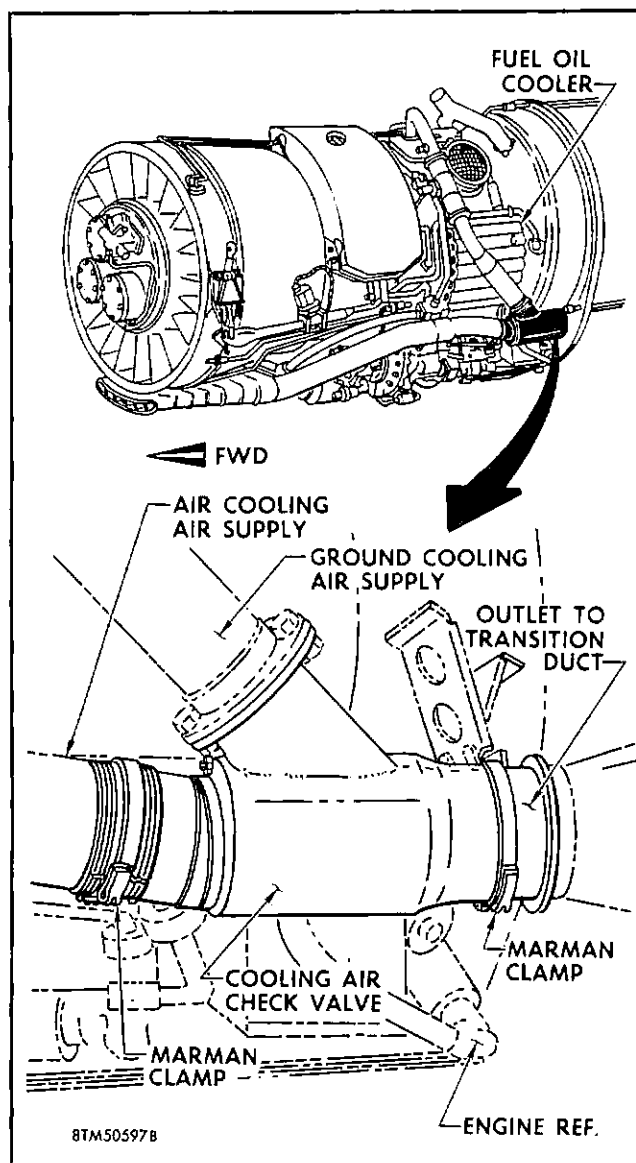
Cooling Air Duct Ground Check Valve Installation
